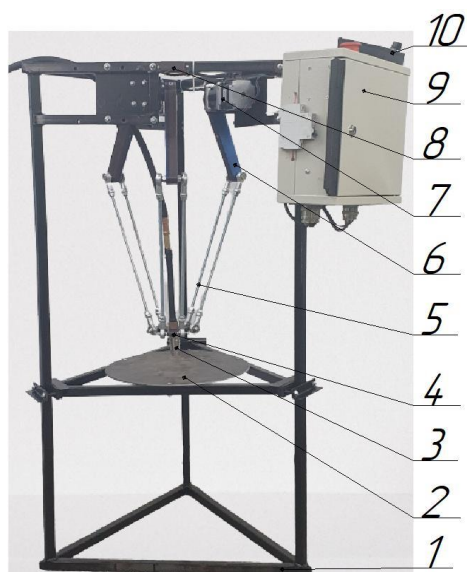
Hardware and software system: 1-frame, 2-table, 3-welding torch, 4-welding torch holder, 5-guide, 6-lever, 7-stepper motor with gearbox, 8-limit switch, 9-control unit, 10-touch screen.
